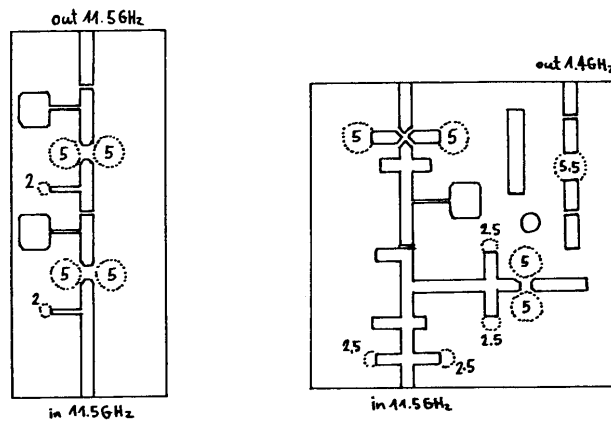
PCB drilling plan. Numbers indicate hole diameters in mm.
